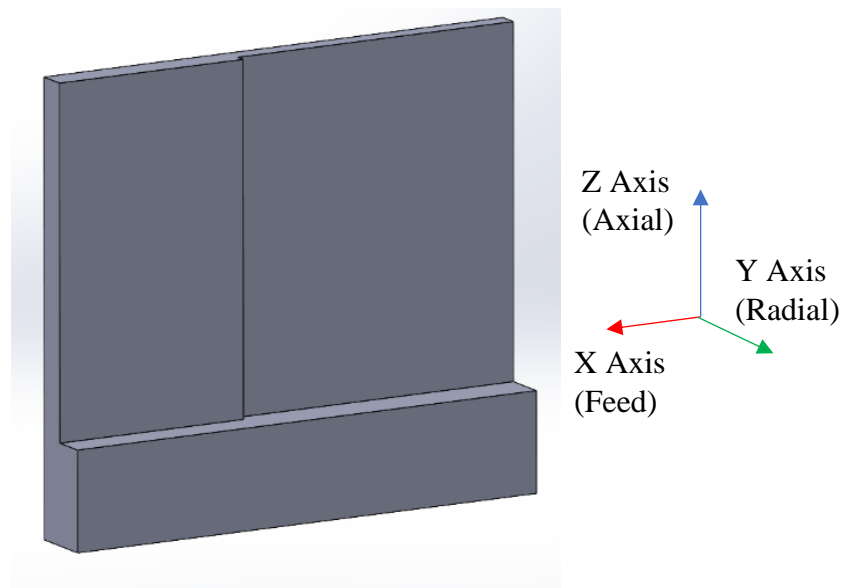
CAD model of 3 mm thick workpiece, undergoing 1 mm radial peripheral milling operation (35 mm of cutter engagement in feed direction)
